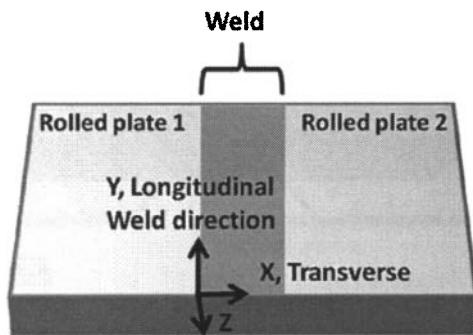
Schematic of the two welded plates and the sample directions
